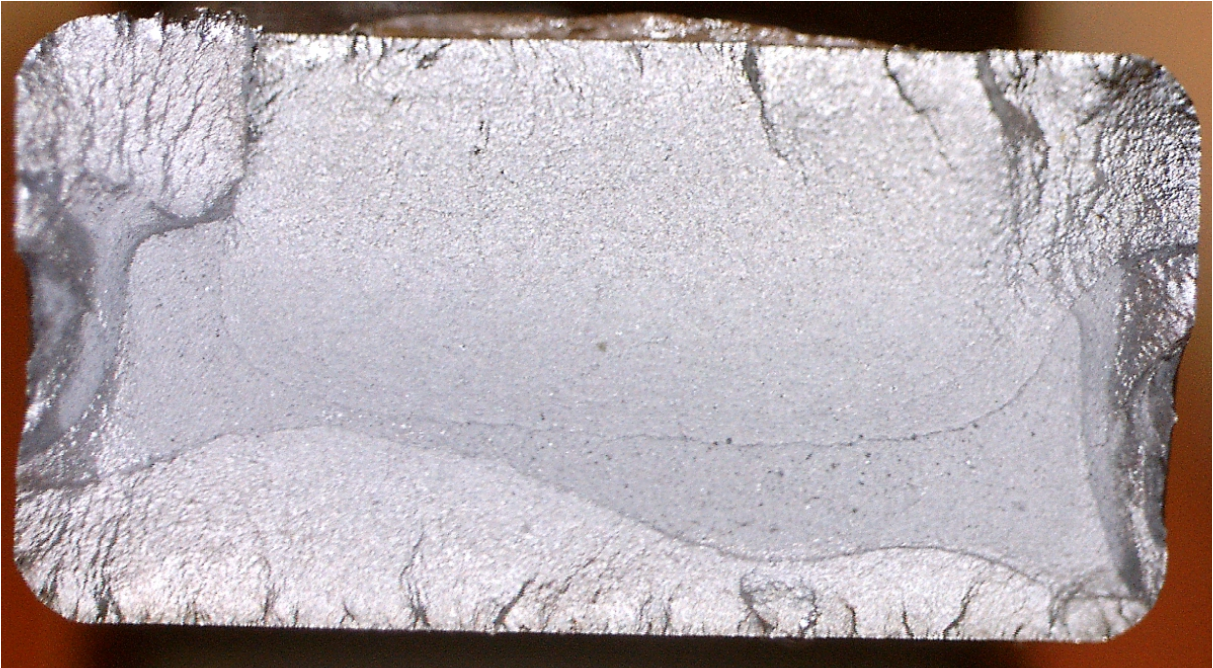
Fracture surface of specimen IT199-15b,  $2N_f=3,070$
